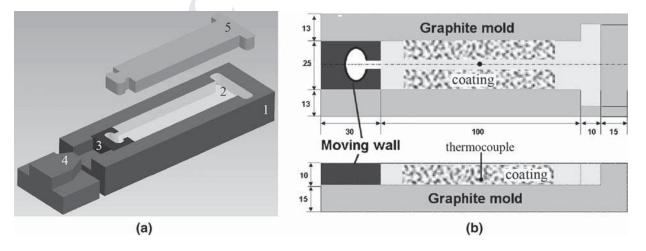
Experimental setup (a): mold (1), cavity (2), moving block (3), displacement sensor (4), and casting/sample (5), and drawing of the mold and coating scheme (b) where dimensions are in mm.
